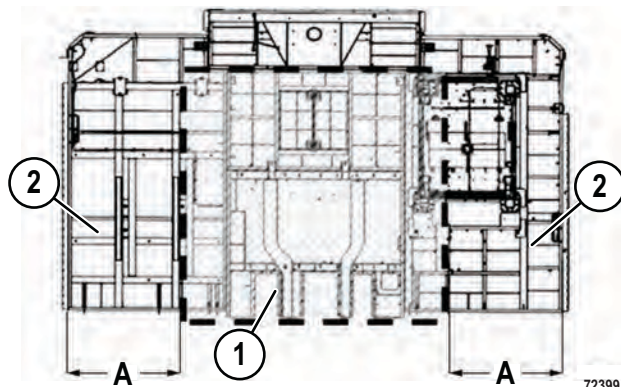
WELDING AREAS ON DECK
